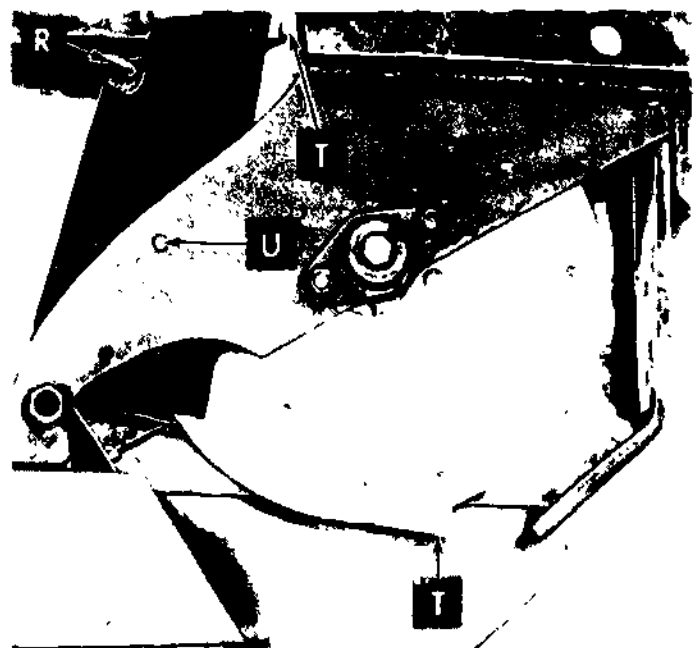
In this illustration, the rotary-valve case has been removed and replaced with a drill case, secured by pin R. The rotor is turned so the lugs T are in the position shown and a pin is inserted at U to lock the rotor.
